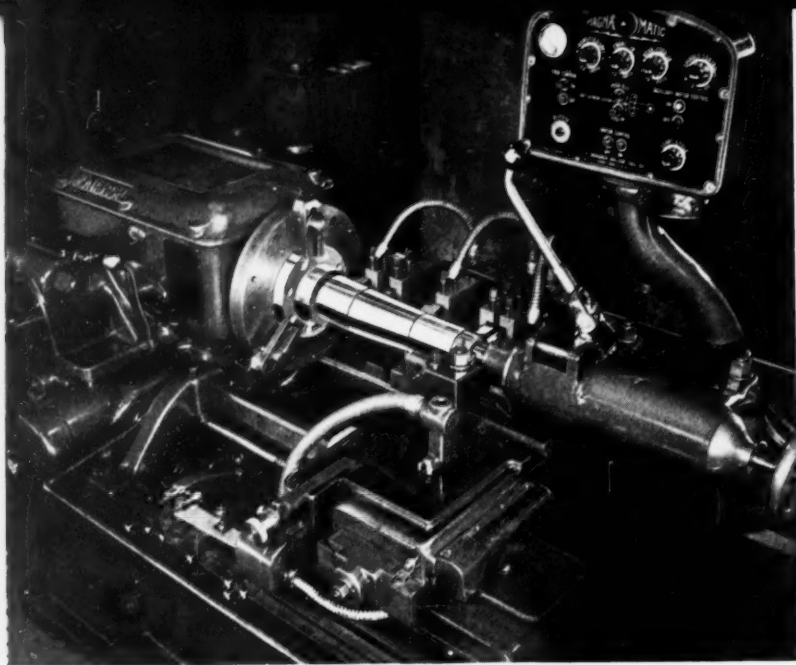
Multiple Tooling Provided on a Lathe for Machining Tank Final Drive-shafts; the Electric Control Speeds up Production
